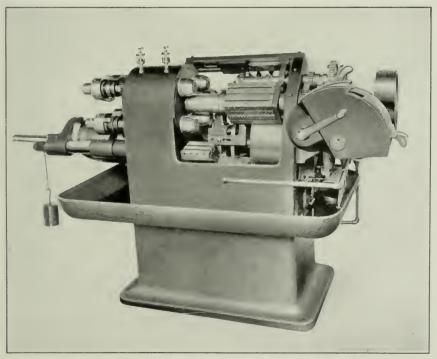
Gridley Multiple-Spindle Automatic Turret Lathe
